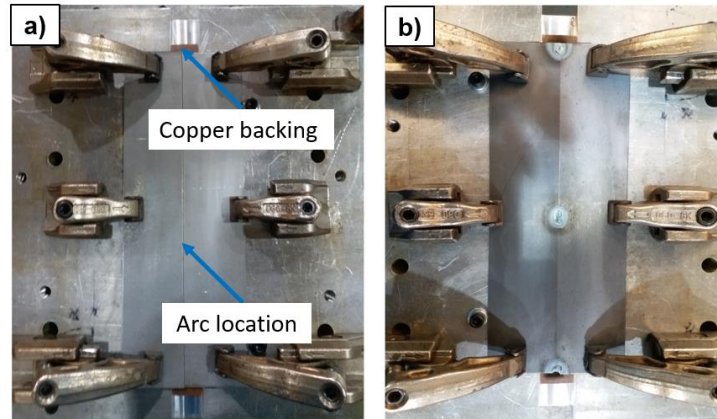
Substrate in a) Clamped condition b) Tack welded condition
